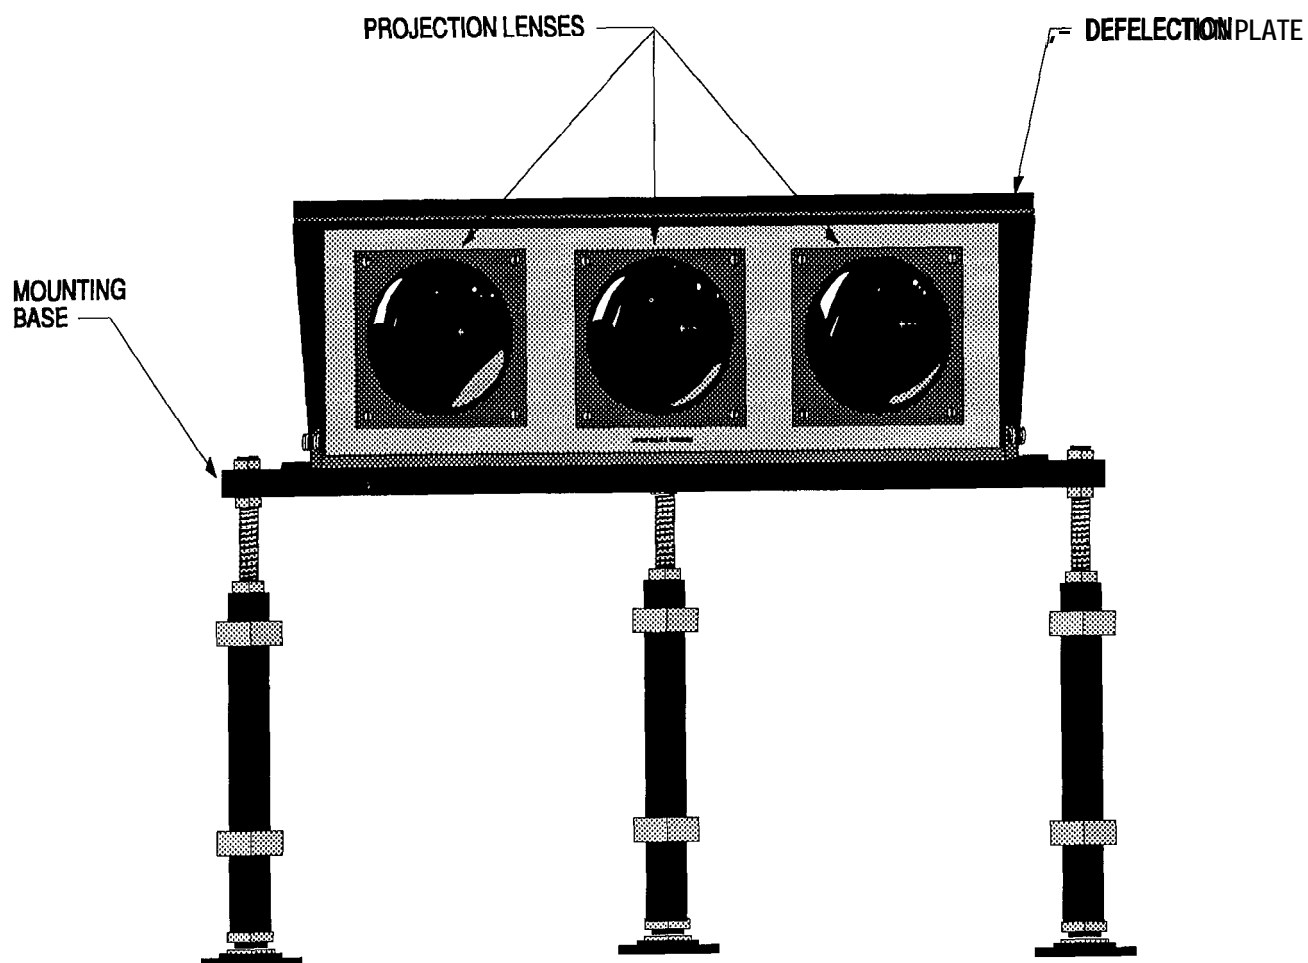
LAMP HOUSING ASSEMBLY (FRONT VIEW)
